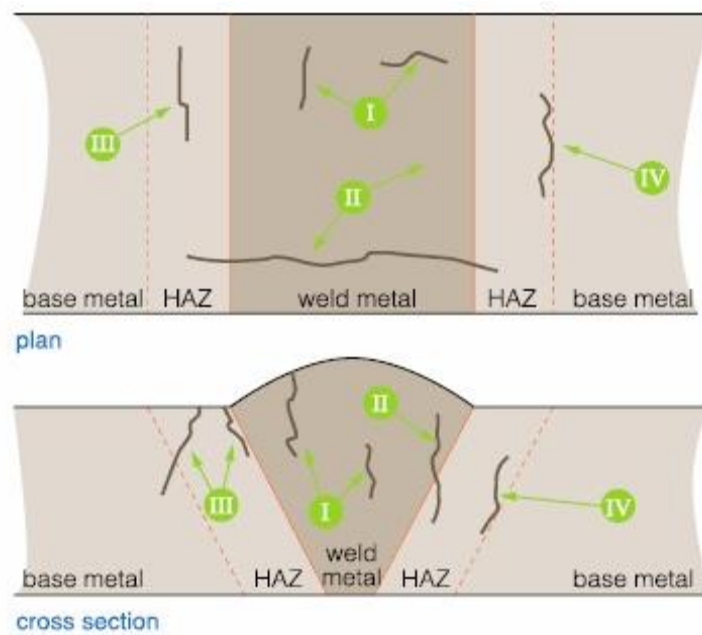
Types of cracking in weld joint of steel [10]
